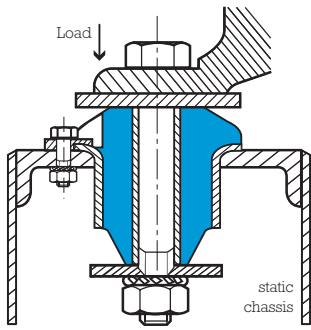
Fixing between the equipment and a metallic chassis (failsafe in mobile applications).
